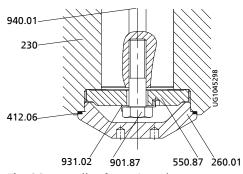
Impeller fastening elements M85x2, M125x2 and M100x2
